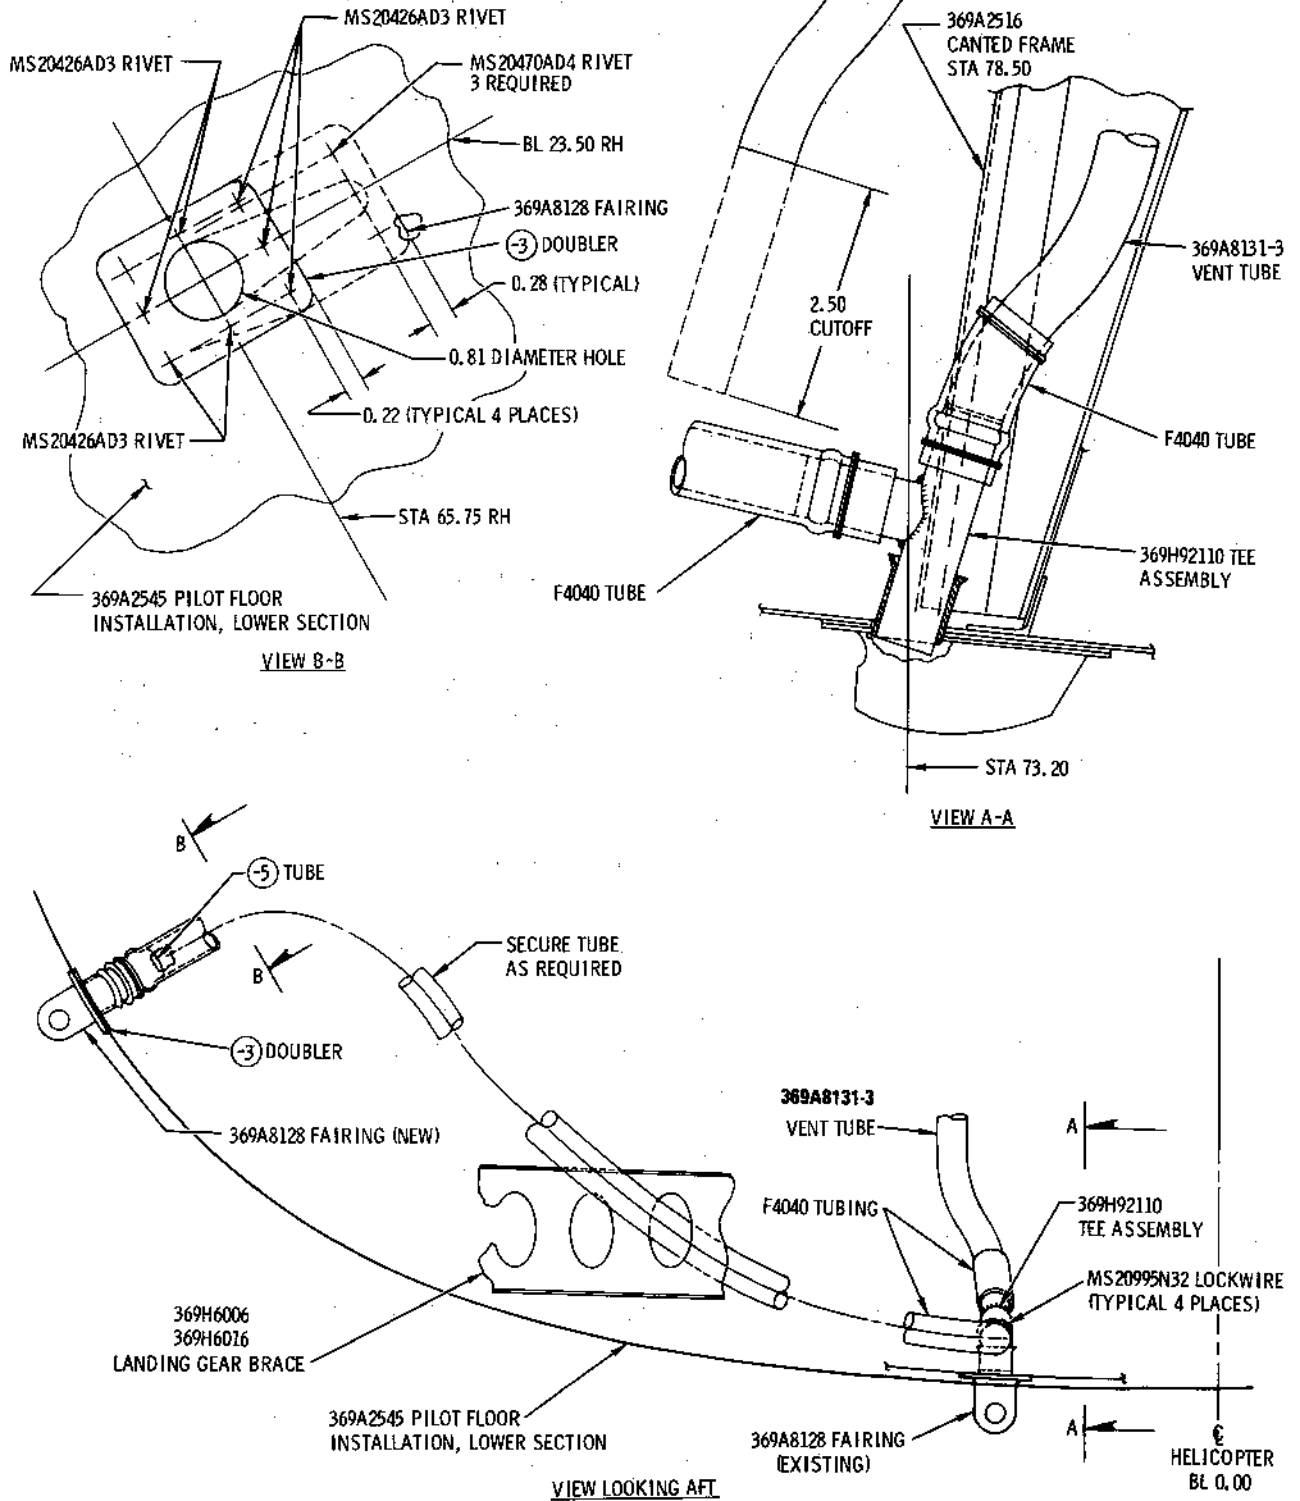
Modification - Fuel Cell Vent System Installation (M50042)
